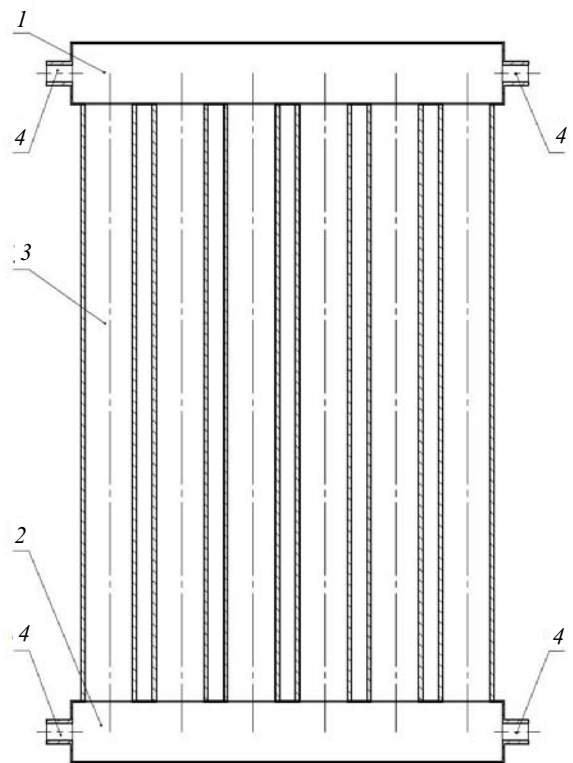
Standard heating radiator: 1, 2 — collectors; 3 — section; 4 — coupling
